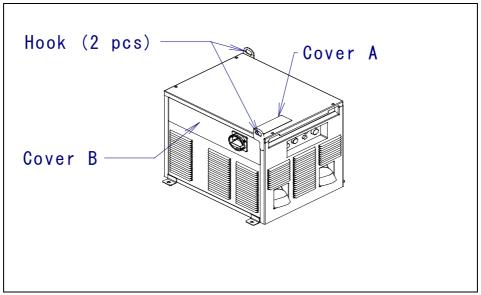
(d) Connection of ROBOWELD iC/H (Power Wave i400) (4/7)
